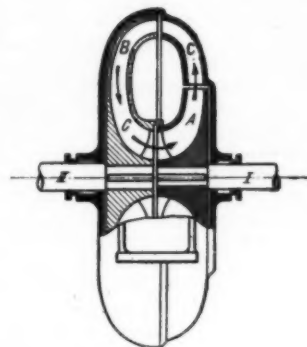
TYPE OF TURBO-TRANSFORMER.
